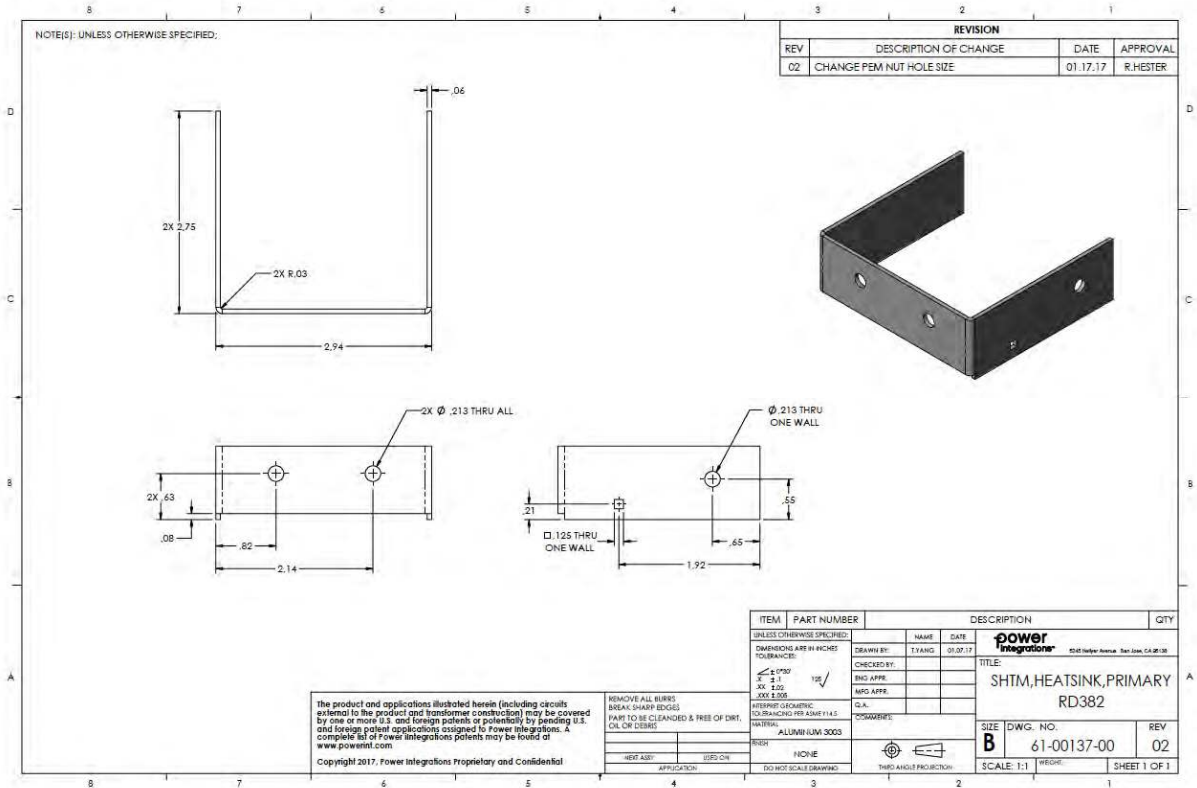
RD-382 Primary Heat Sink Sheet Metal Drawing.
